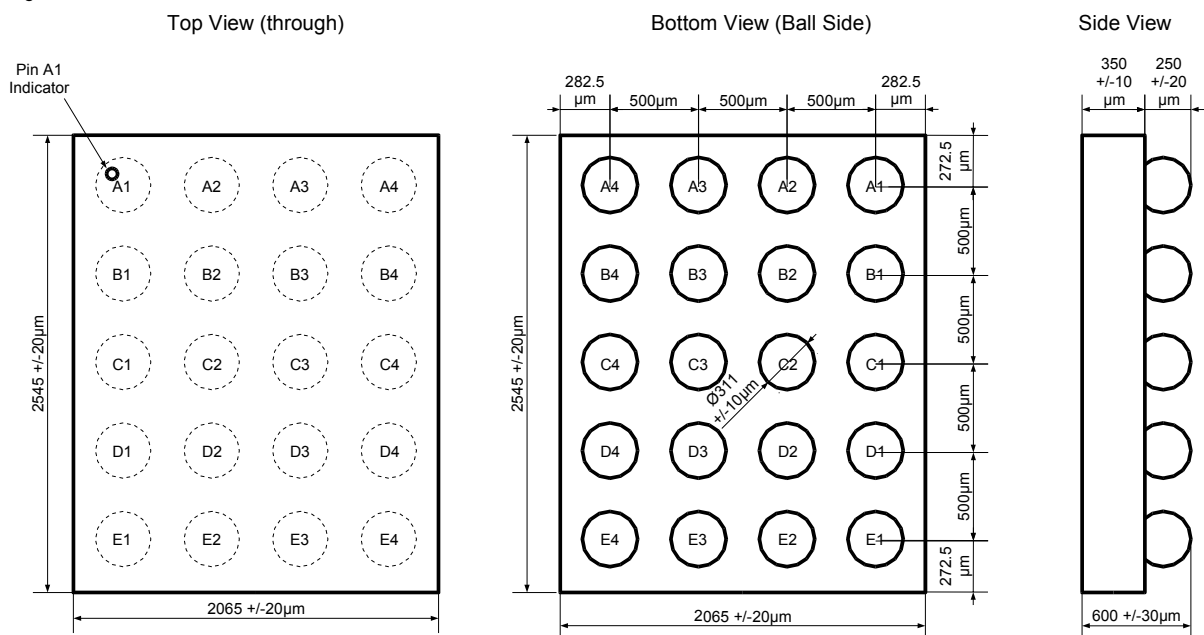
WL-CSP 4x5 Balls Package Drawing
